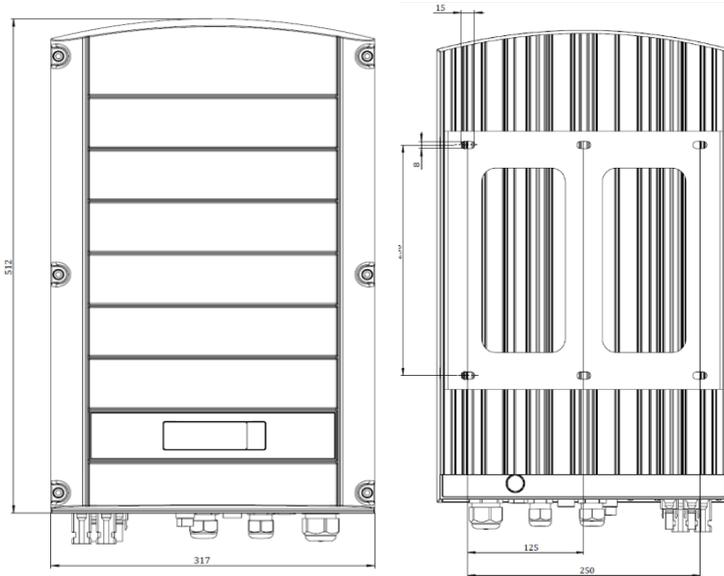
Single-phase inverter with a media type 1 - Front and Rear view
